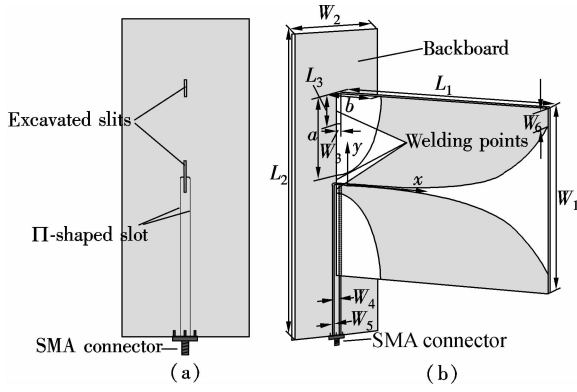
Design prototype of CPW-fed BTSA. (a) Backboard; (b) Assembly with BTSA radiator
